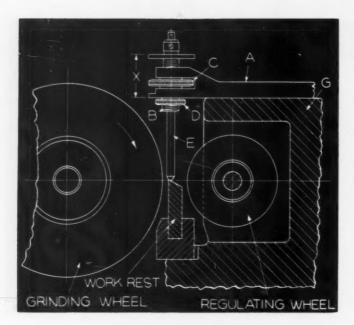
Support bar (A) rests on machined top surface of housing (G) while measuring rod (E) gages the work-rest setting.
